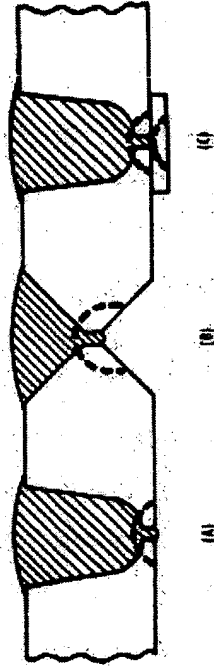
Typical gouging operations that may be applied to arc welds.
